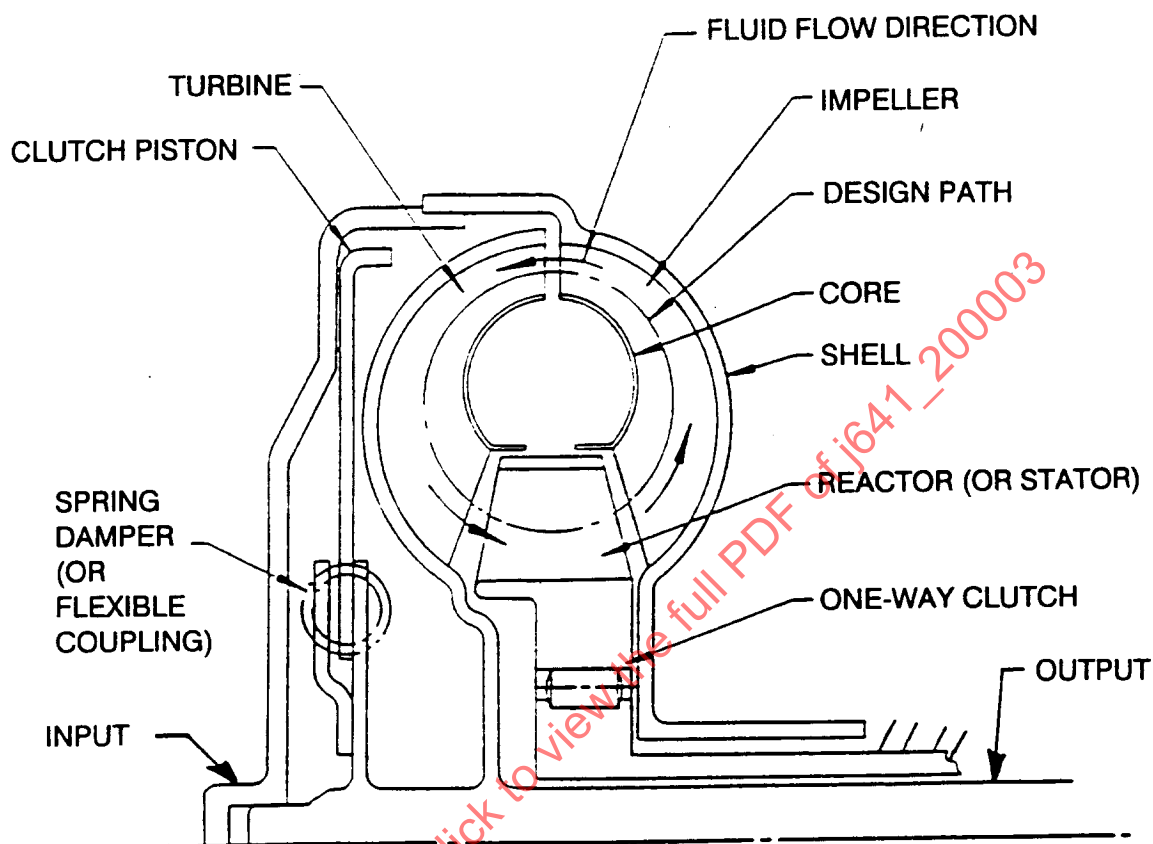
CLUTCH-TYPE TORQUE CONVERTER
